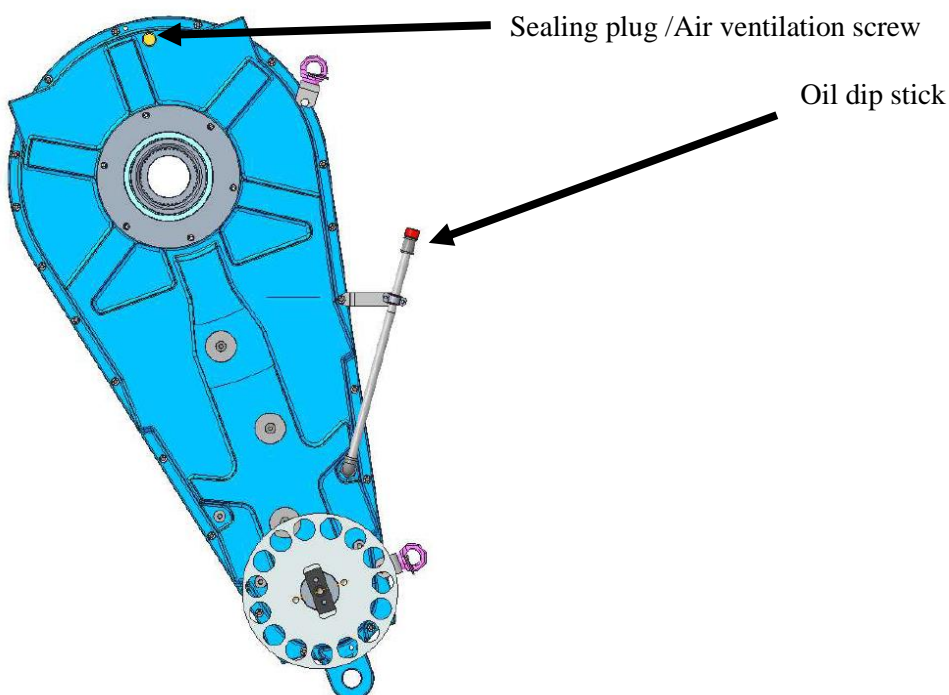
Intermediate gear, oil dip stick and air vent screw, angular mounting position approx. 70°
